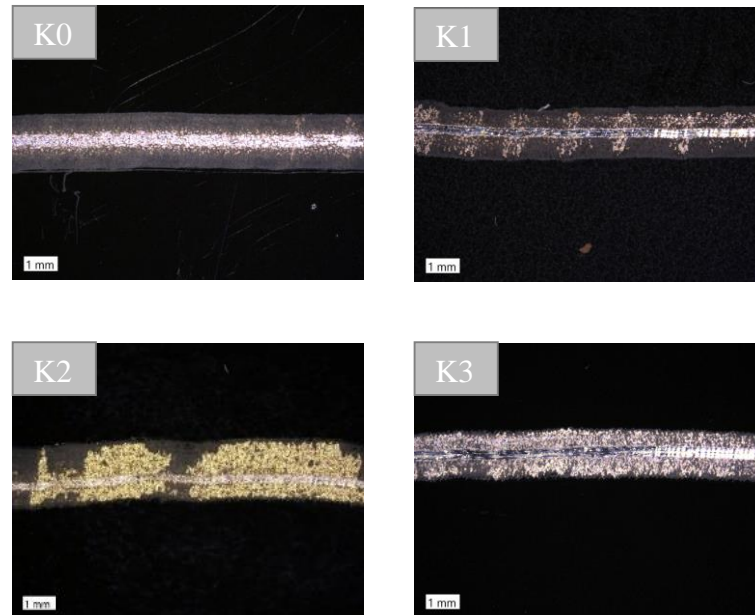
Scratch marks on CED specimens with matching scratch test grades K0, K1, K2, K3
